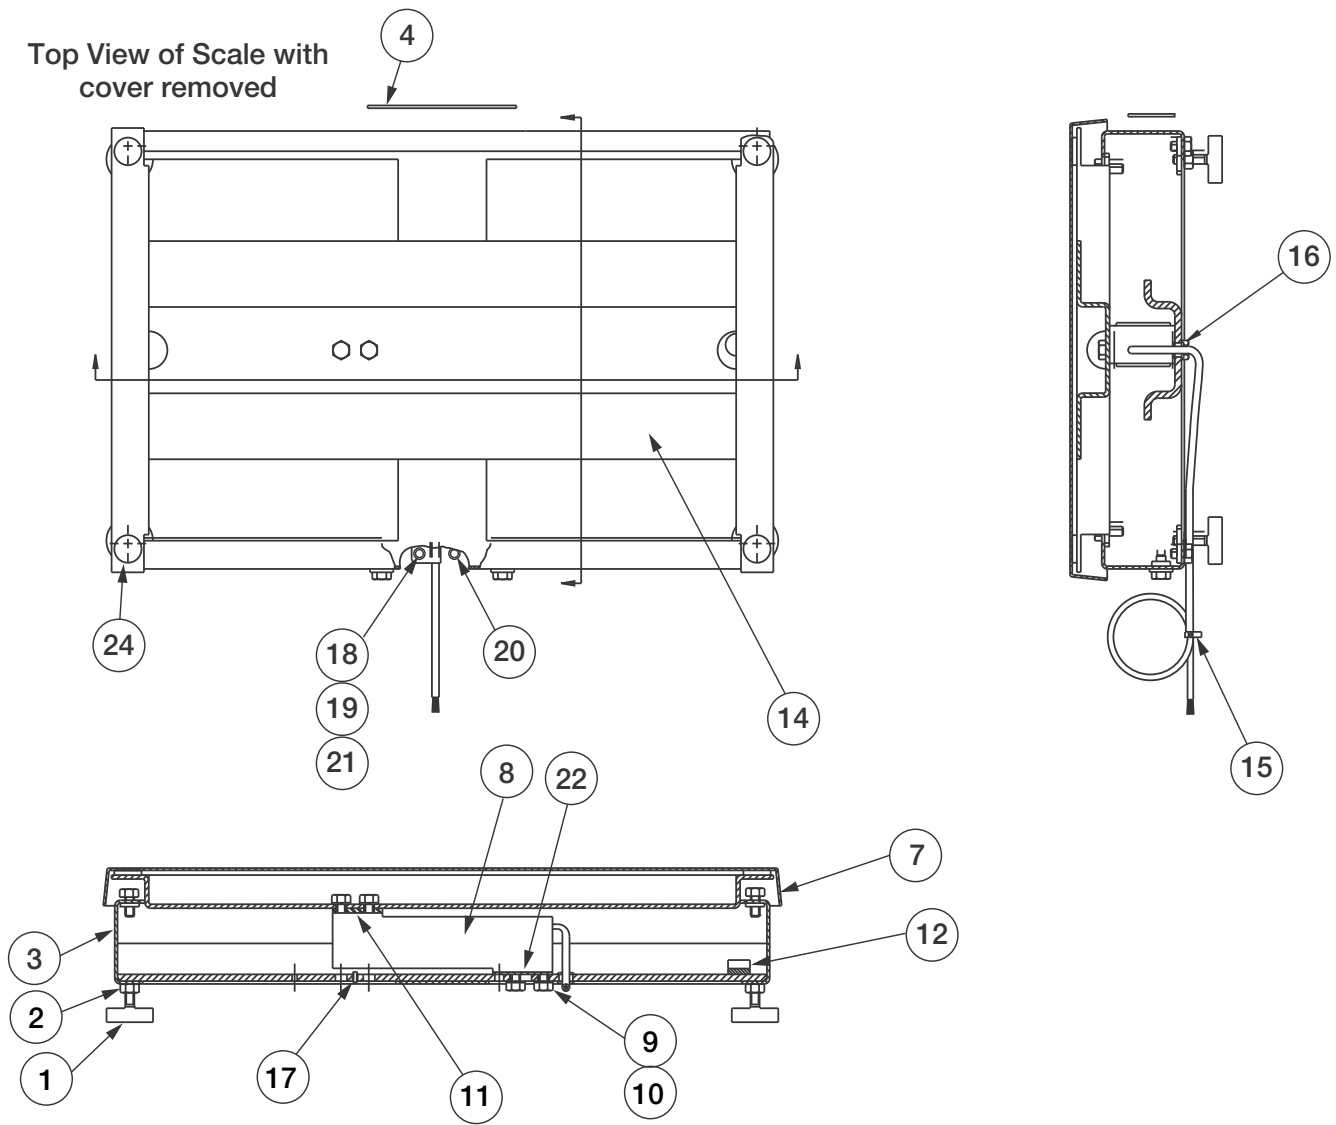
12" x 18" Stainless Steel Parts Illustration
